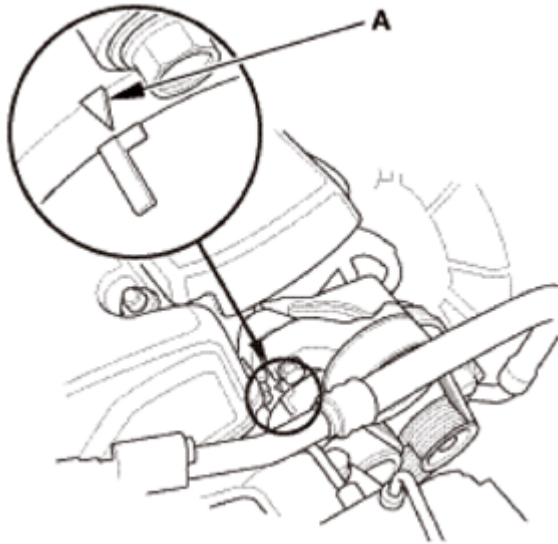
Identifying Auto-Tensioner Indicator Pointer
